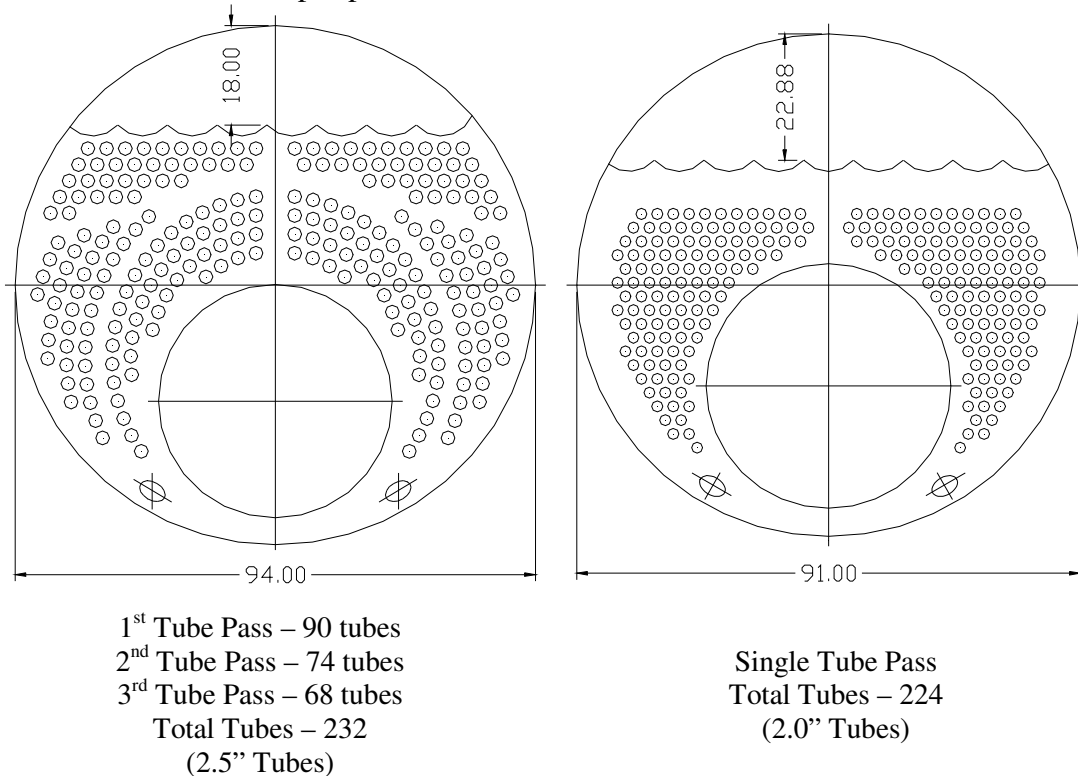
Tube Layout Comparison of Johnston Boiler Company's 500 hp
